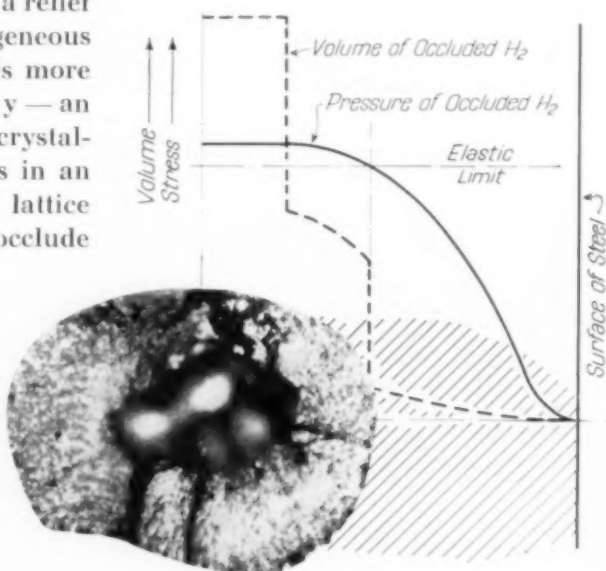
An Unusually Fine Example of Fish-Eyes in Fractured Weld Metal, Magnified 3 Diameters
